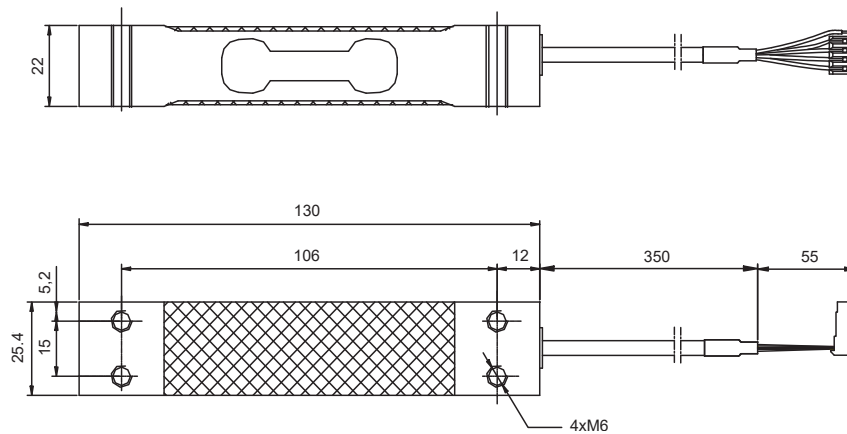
Technical drawing of the PW6C Load Cells (dimensions are given in mm)
